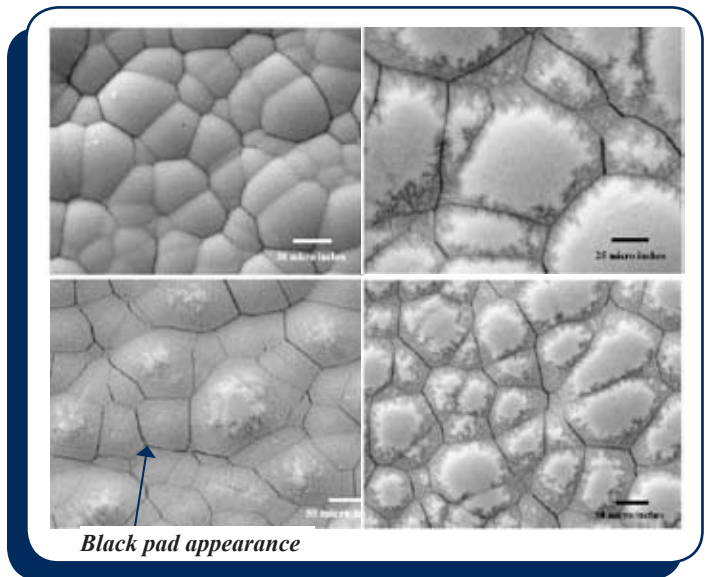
Progressive clockwise images of ENIG PCB pads treated to induce Ni corrosion
